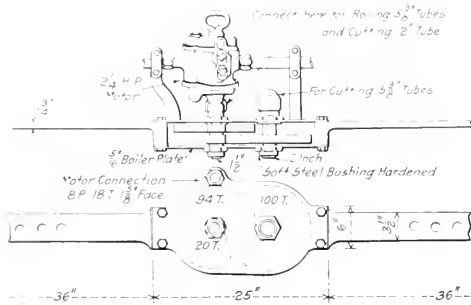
Apparatus for Driving Tube Cutters in Locomotive Front Ends
